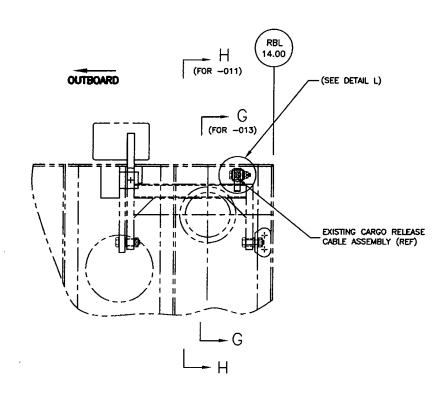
Detail B. View looking Aft (Pilot's Side) (-011/-013 Installations)
